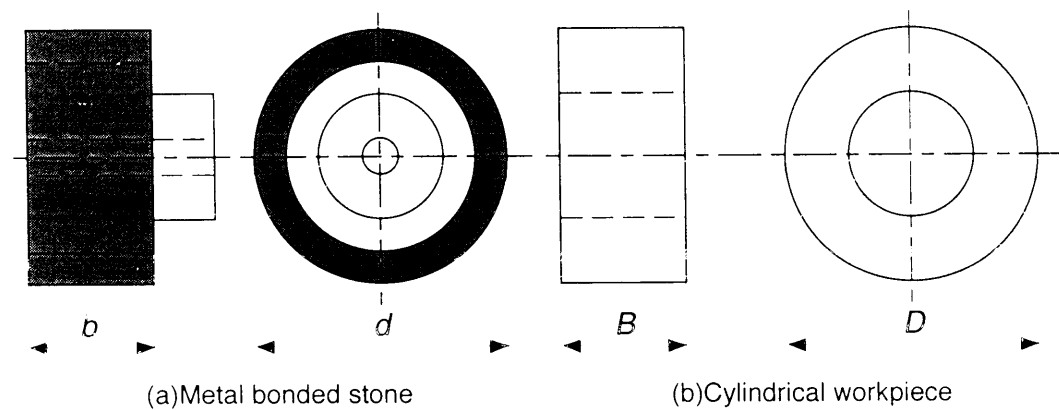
Dimension of ring type stone and cylindrical workpiece
